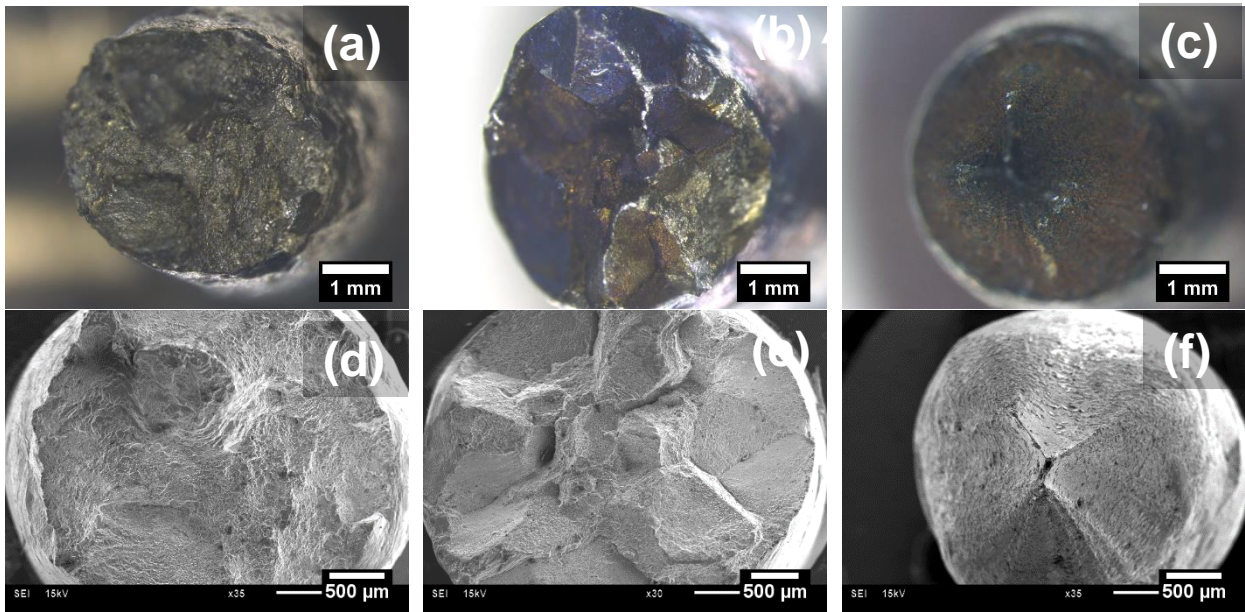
Stereo micrographs showing the fractured surfaces of hybrid manufactured and tensile tested specimens, the specimens were prepared with (a)-(c) Ablation, and (d)-(f) Just-cut, prior to additive manufacturing
